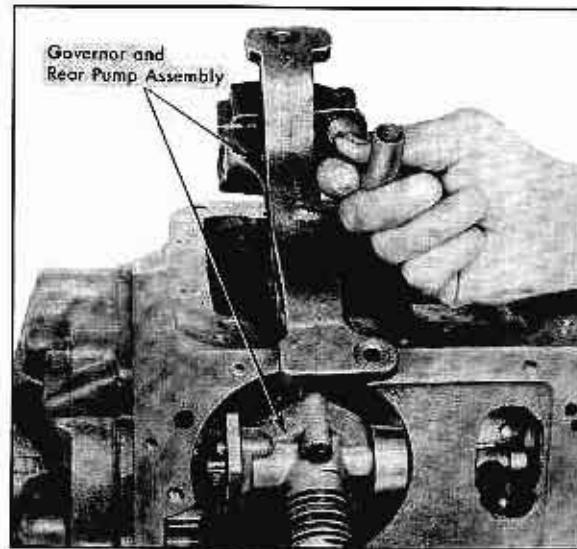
Removing Rear Oil Pump and Governor Assembly
